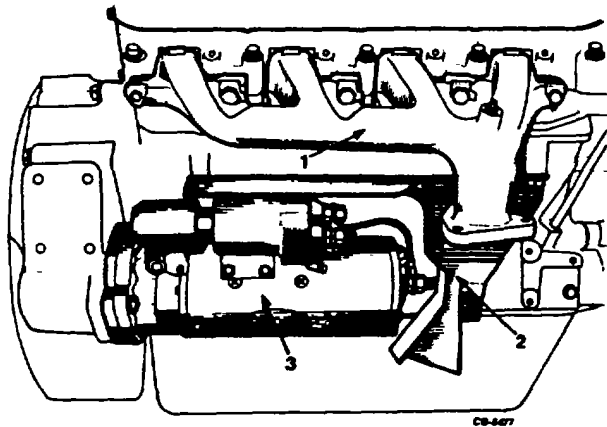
Remove Exhaust Manifold, Heat Shield and Starting Motor
